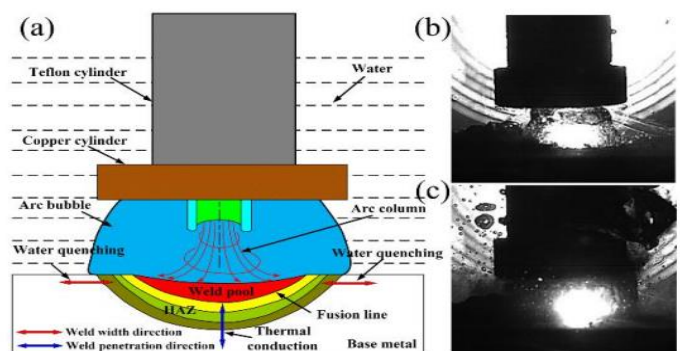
Simplified arc bubble during the mechanical constraint assisted underwater wet welding [2]
